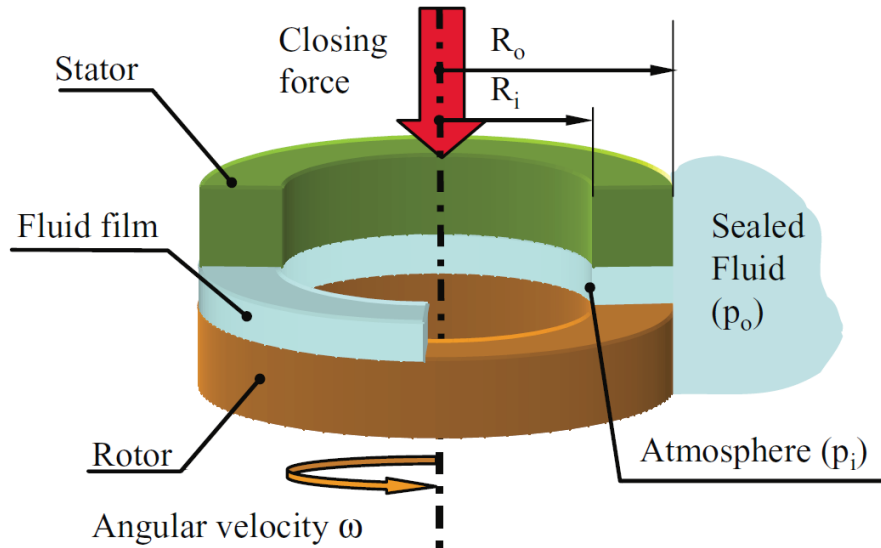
Partial cut-view of a mechanical seal depicting the fluid film layer formed between the seal faces, reprinted from [5]
